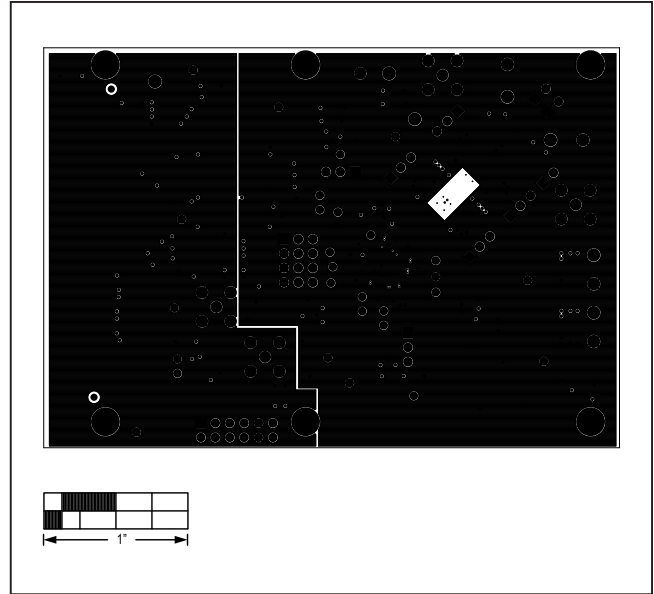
MAX11905 Differential EV Kit PCB Layout—Layer 2
